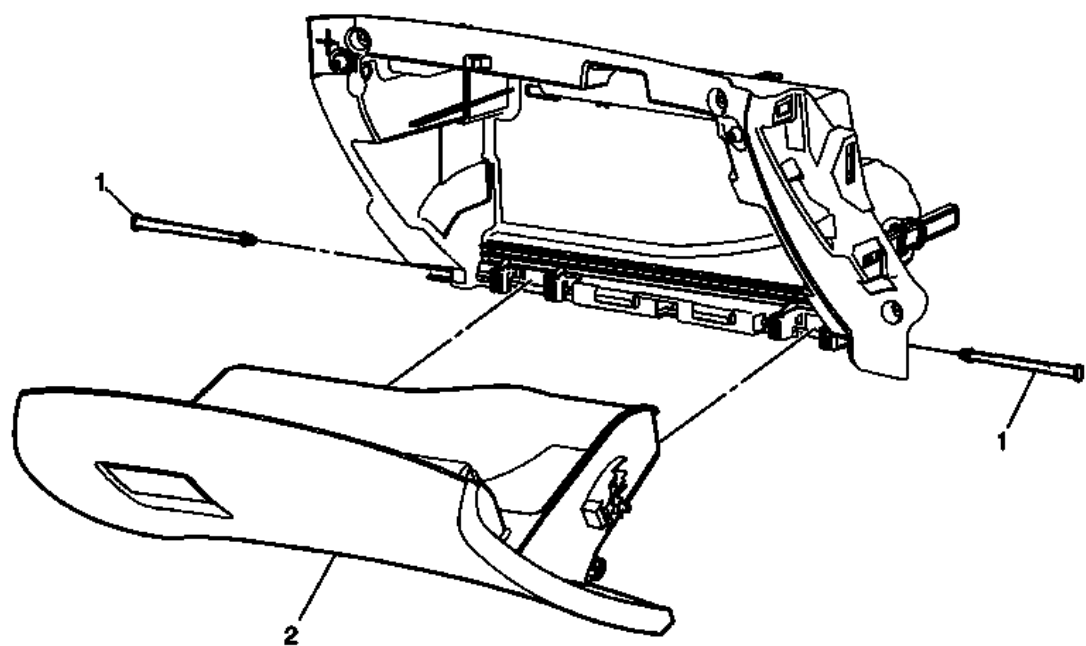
Instrument Panel Compartment Door Assembly & Hinge Pins
